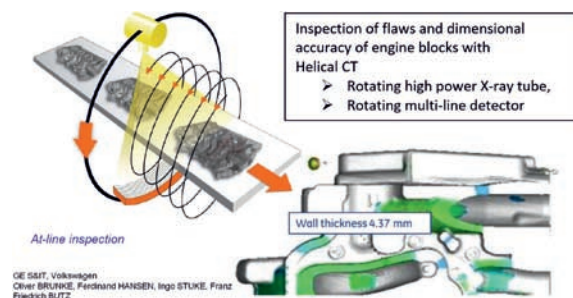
At-line inspection of engine blocks in the manufacturing process with helical CT for defect detection and dimensional measurement.
